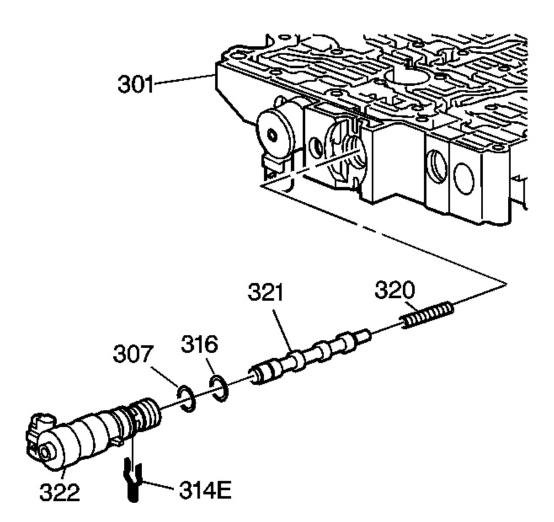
View Of PC Solenoid Valve & Torque Signal Regulator Valve Courtesy of GENERAL MOTORS CORP.
